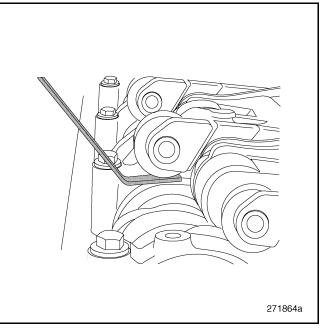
Checking Brake Rocker Arm Roller to Cam Lobe Clearance
